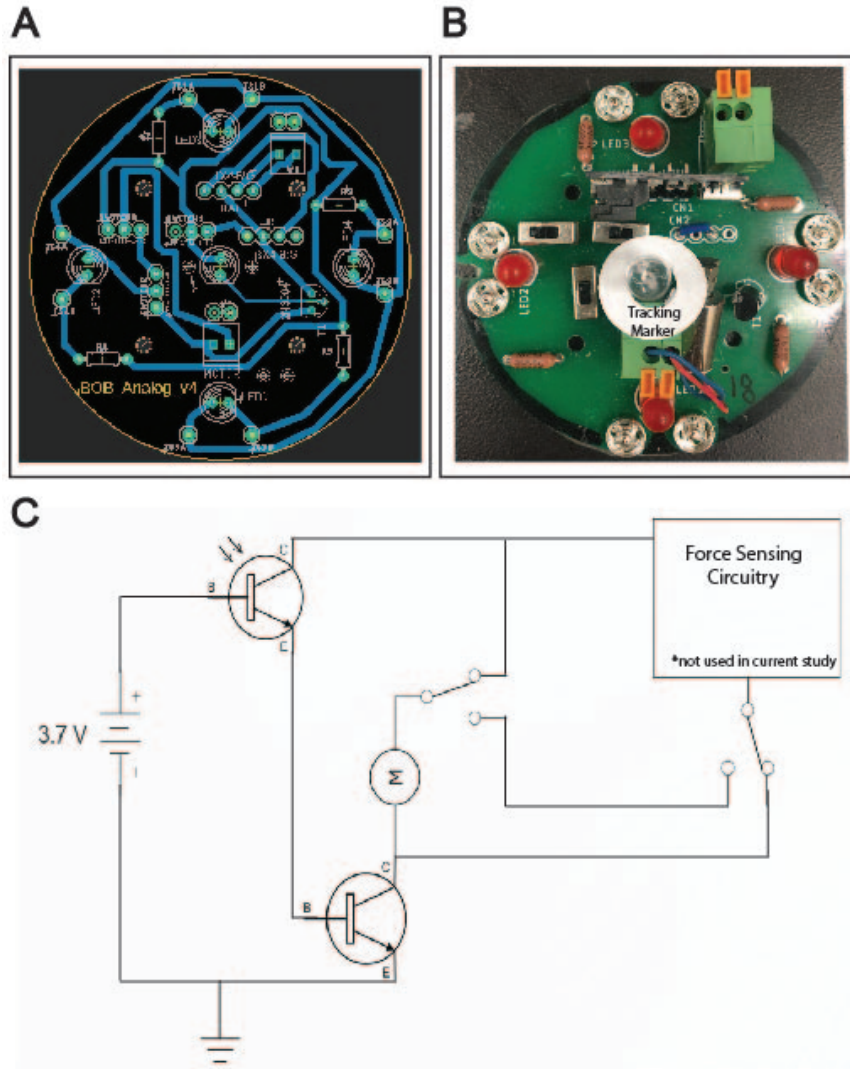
BOBbot circuitry. (A) The analog PCB design, made in EagleCAD. (B) The printed PCB. (C) The force sensing circuitry, implemented in the PCB but unused in the present study.
